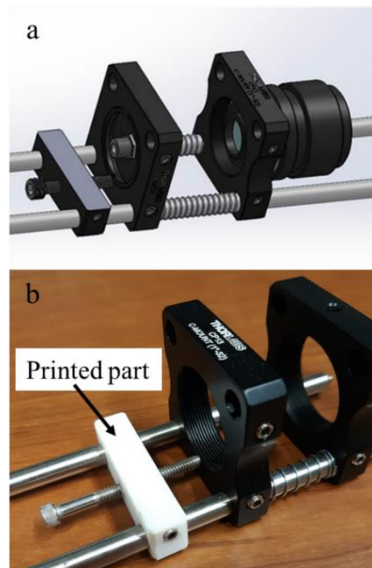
In-house linear translation system using commercial optical cage components and one 3D printed part. (a) Shows the full design with the fiber connector plate and lens in place. (b) The actual assembly with printed part deployed.
